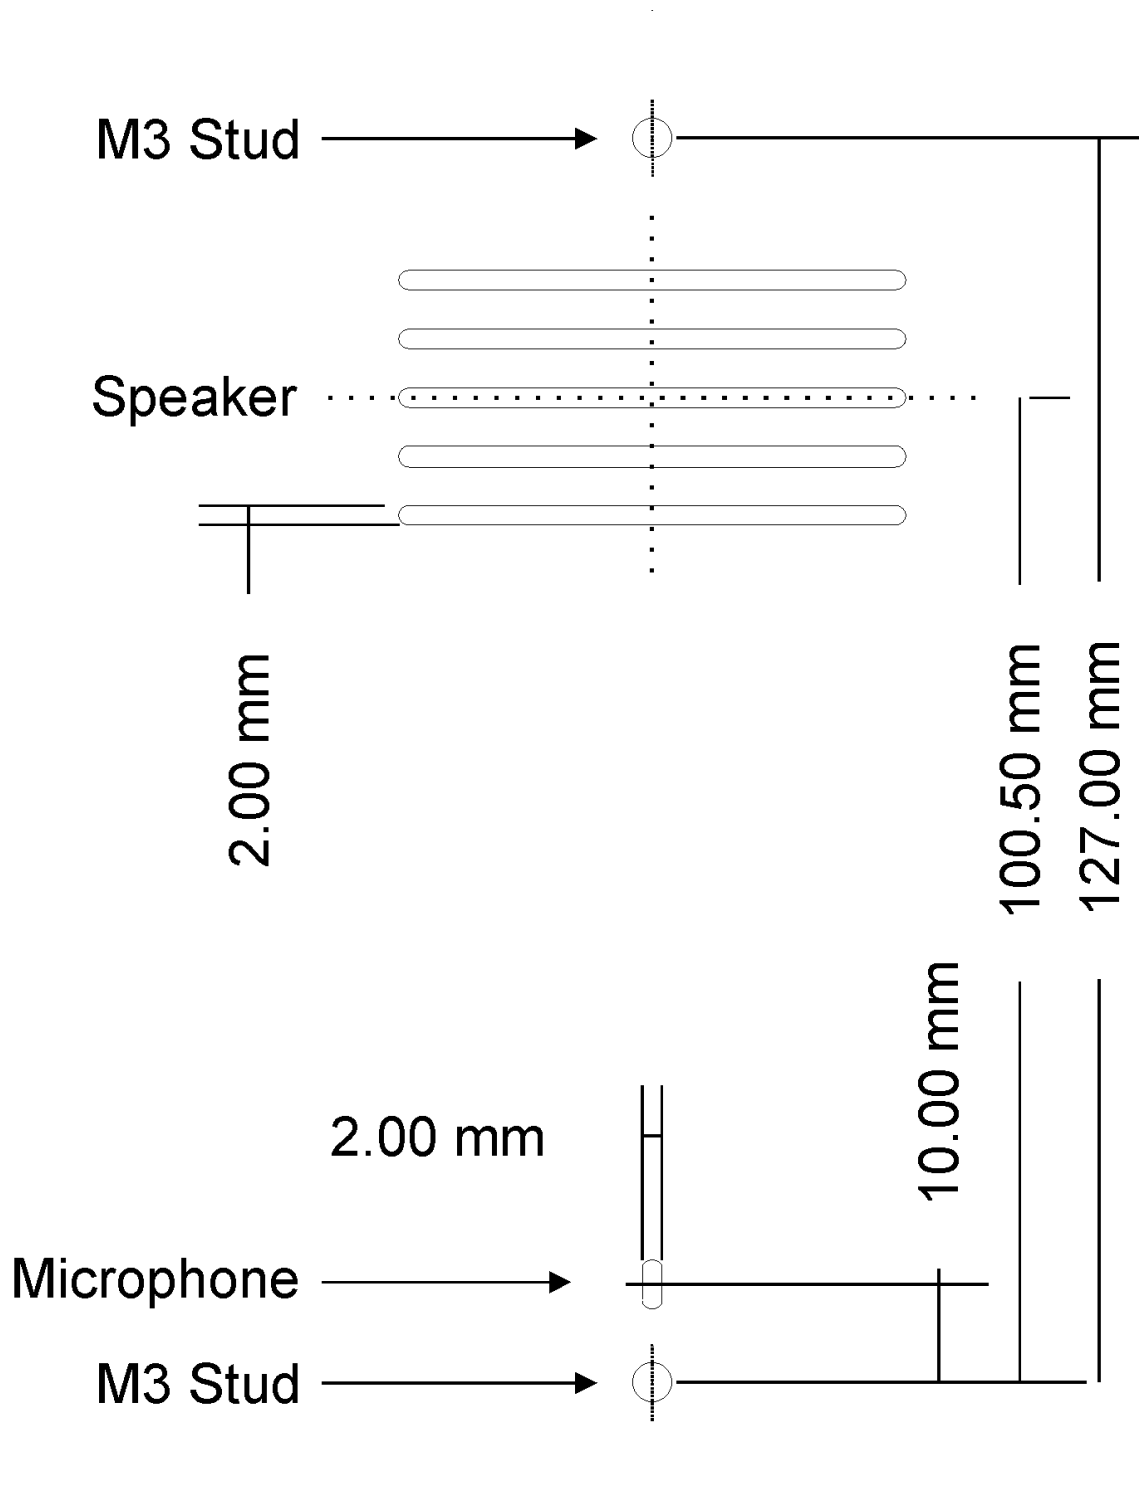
Stud Mounting & Grill Cut-out Positioning
